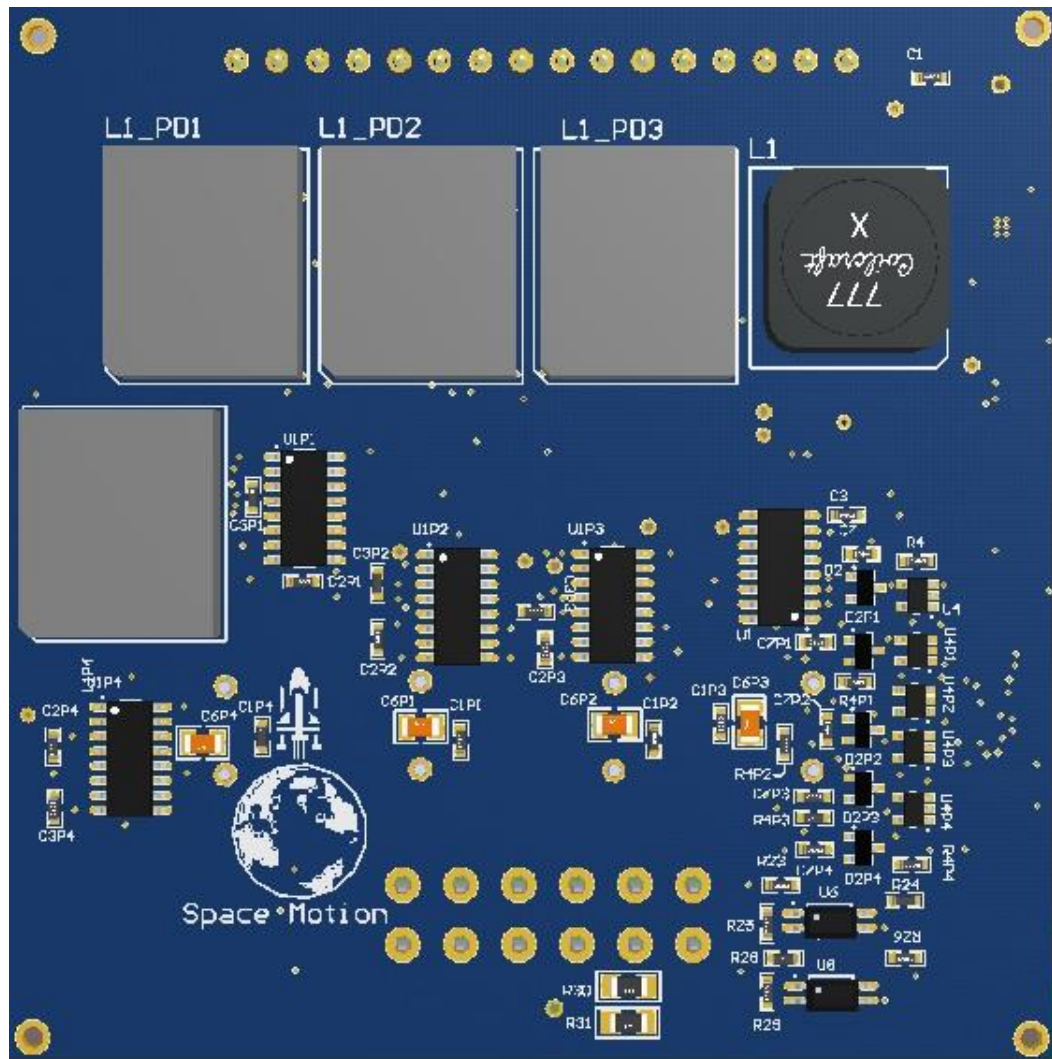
3D Model Bottom side of 1C601 Power Driver Board
